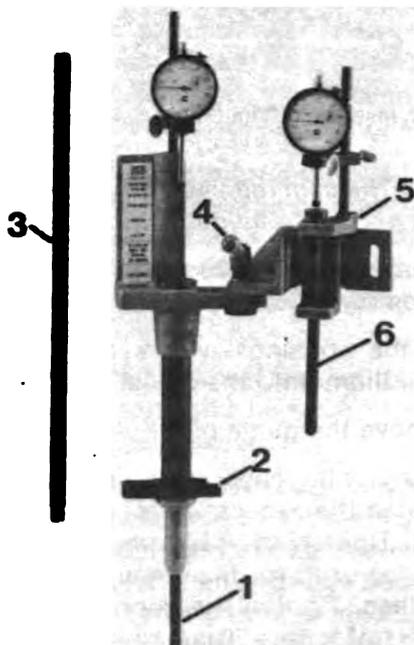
The Part No. 3375522 Injection Timing Tool.
